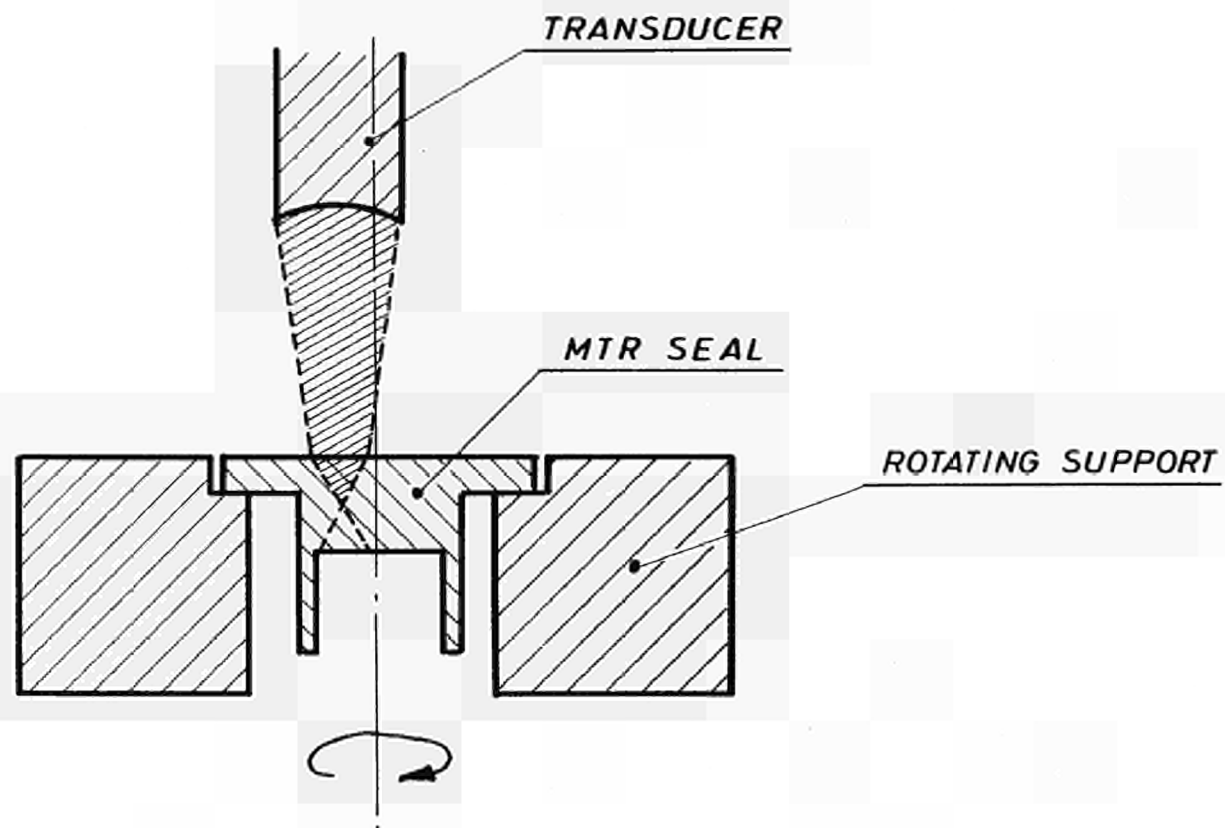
MTR RIVET SEAL IDENTIFICATION DEVICE
